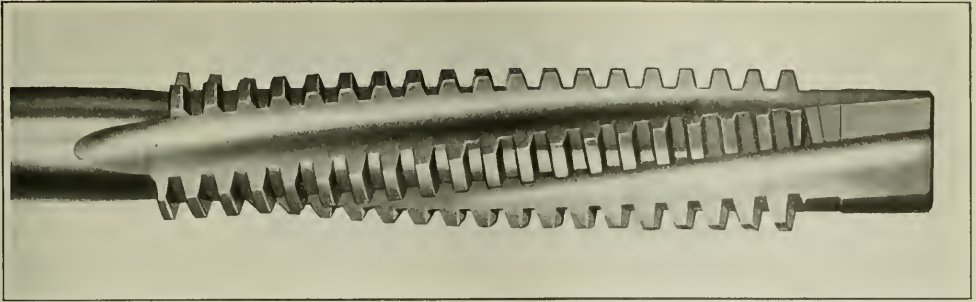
Acme Double-thread Finishing Tap having Relief, Spiral Flutes, and Taper in the First Threads
